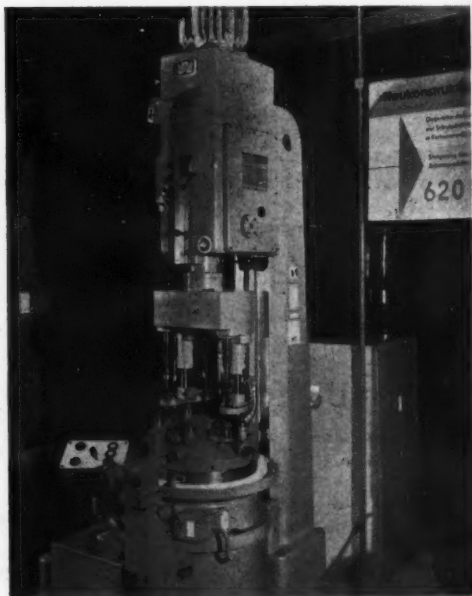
Standardized units including the column, spindle head, base, and indexing table, are incorporated in this special-purpose drilling and reaming machine. Only the multi-spindle adapter and the 5-position fixture were specially made
